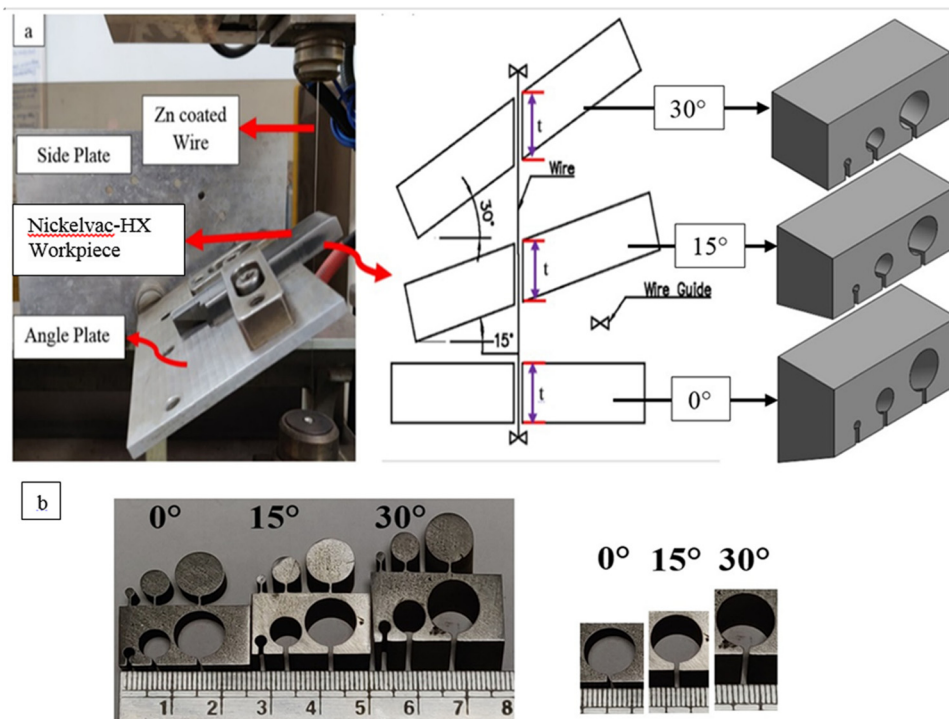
(a) Slant fixture on WEDM table at 0°, 15°, and 30° angular positions and components after machining. (b) Machined components.
